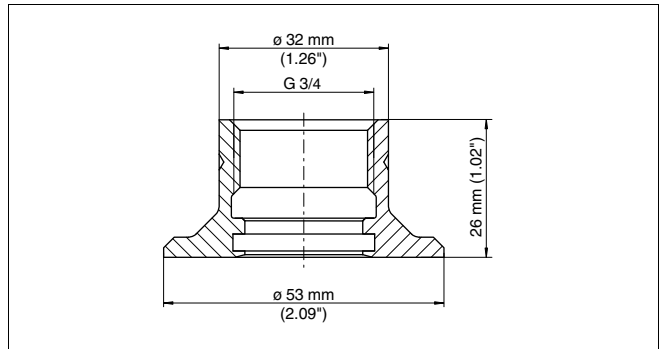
Dimensions welded socket G $\frac{3}{4}$  A acc. to DIN 3852-X
